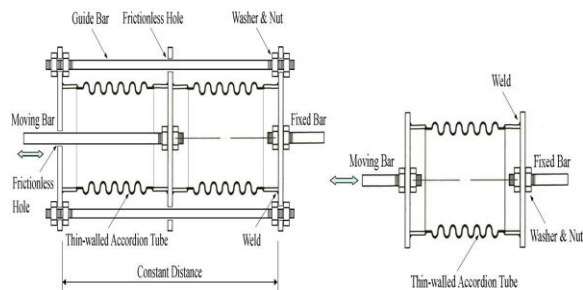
Schematic view of the specimens prior testing: a) coupled specimen; b) single specimen.
